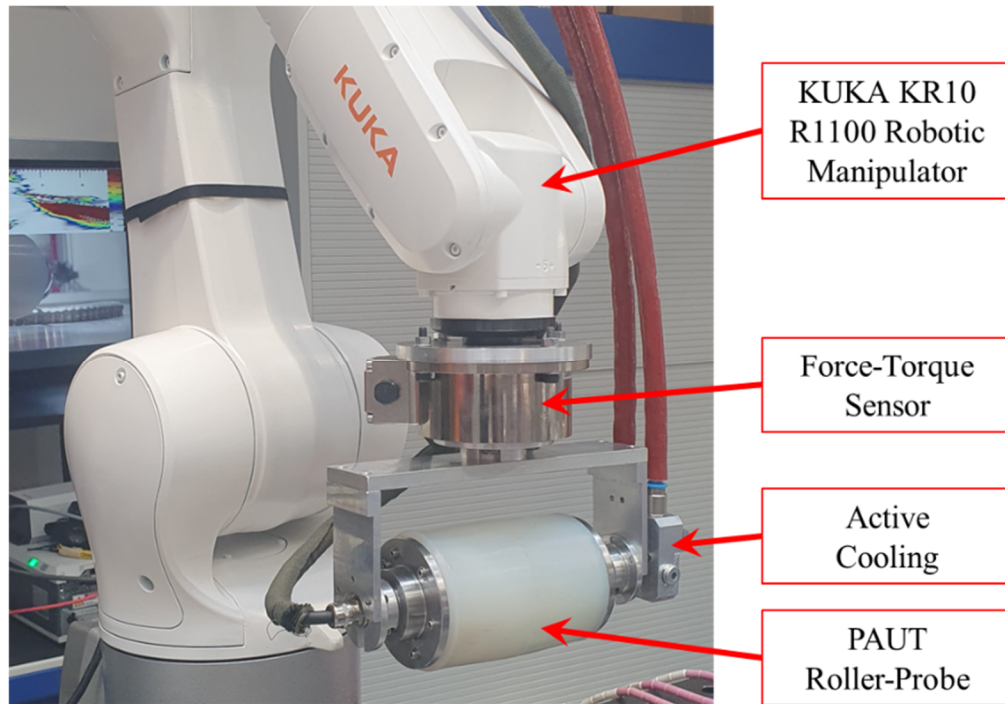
PAUT roller-probe with force-torque sensor and robotic manipulator
